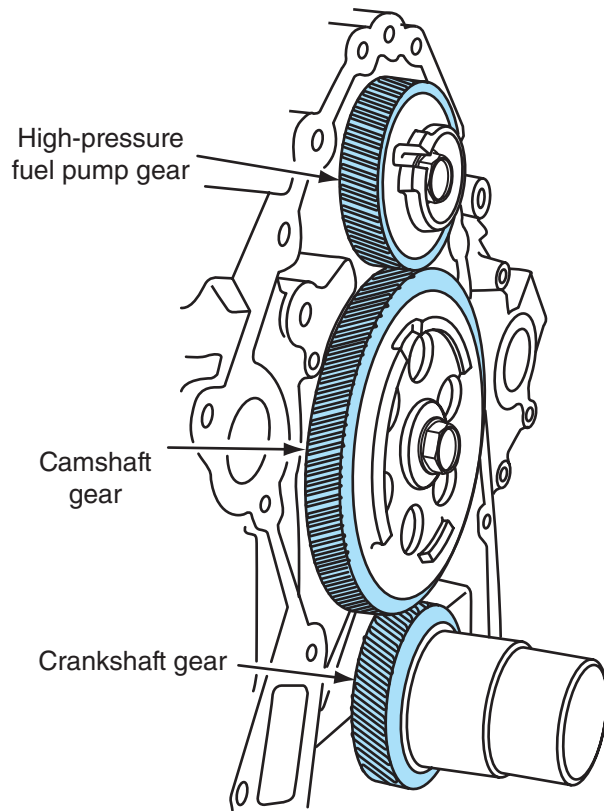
The crankshaft, camshaft, and fuel pump gears must be perfectly aligned.
